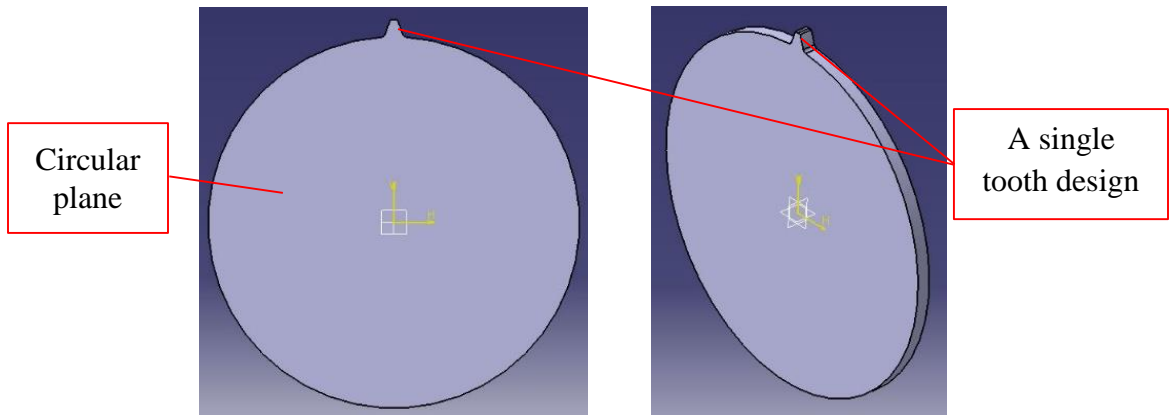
First stage of single tooth 2D and 3D drawings of the slip-on sprocket
